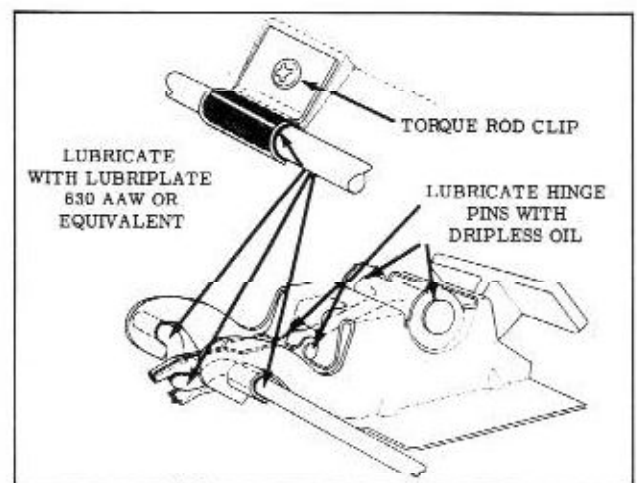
Back Door Hinge & Torque Rod Lubrication
